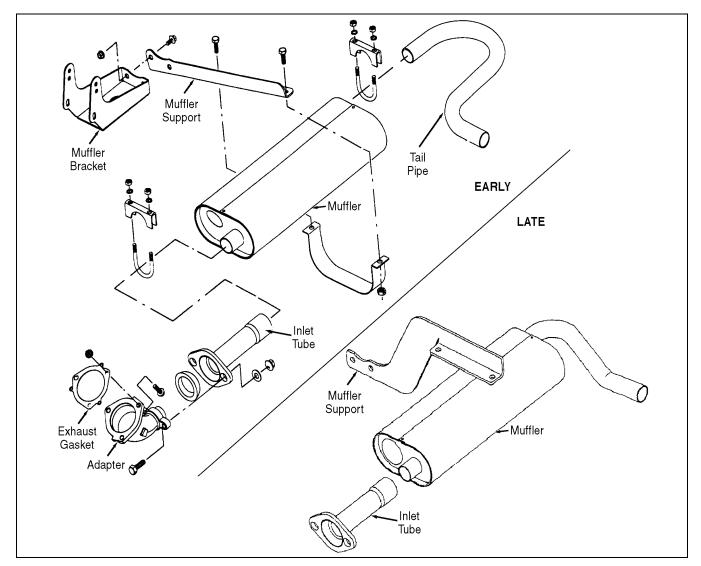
E-7. Muffler and Exhaust System ó 3-Cylinder Engine (Suzuki 660)
